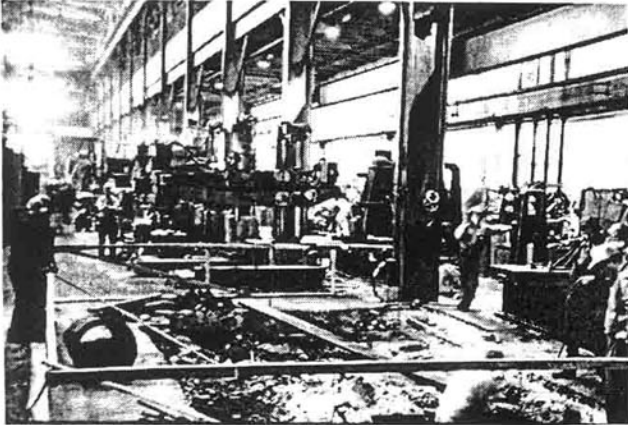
Building 42N machine shop (looking north) showing milling machines and preparation of slab for new machine footing.
